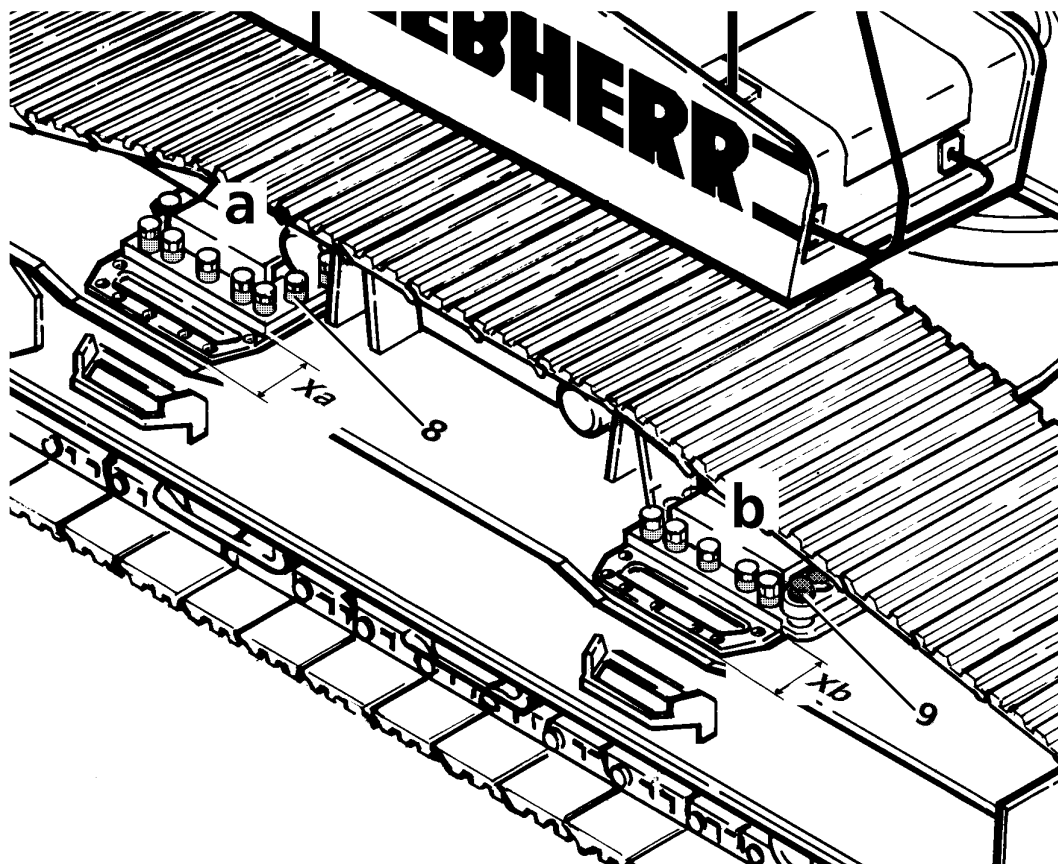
Side frame mounting bolts 8 und stops mounting bolts 9
